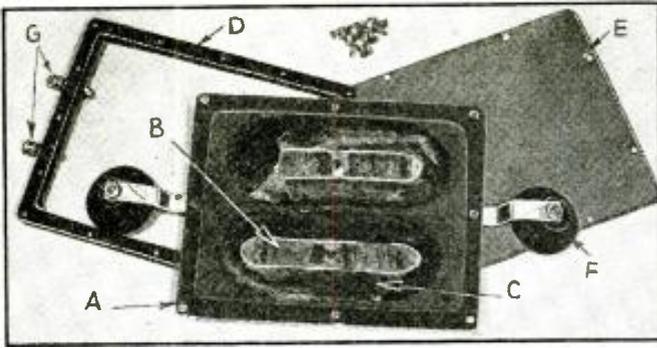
Fig. A. Exploded view of the pickup; A, brass plate; B, saw blade core; C, winding; D, frame; E, fibre back; F, suction cup mounts; G, terminal posts. Note the insulating compound.
